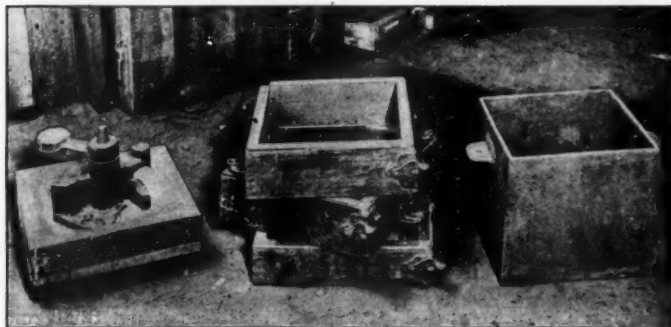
A PATTERN OF A SHAPE BEST ADAPTED TO FLOOR MOLDING
